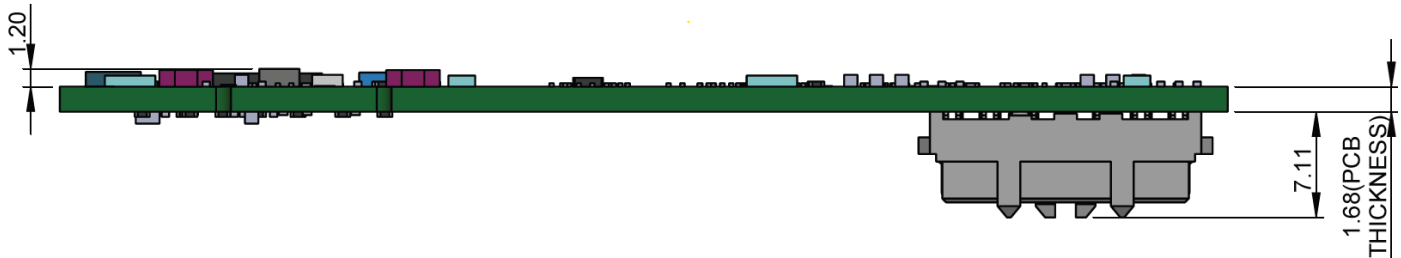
FMC/FMC+ Loopback Test Module Mechanical dimension – Side View
